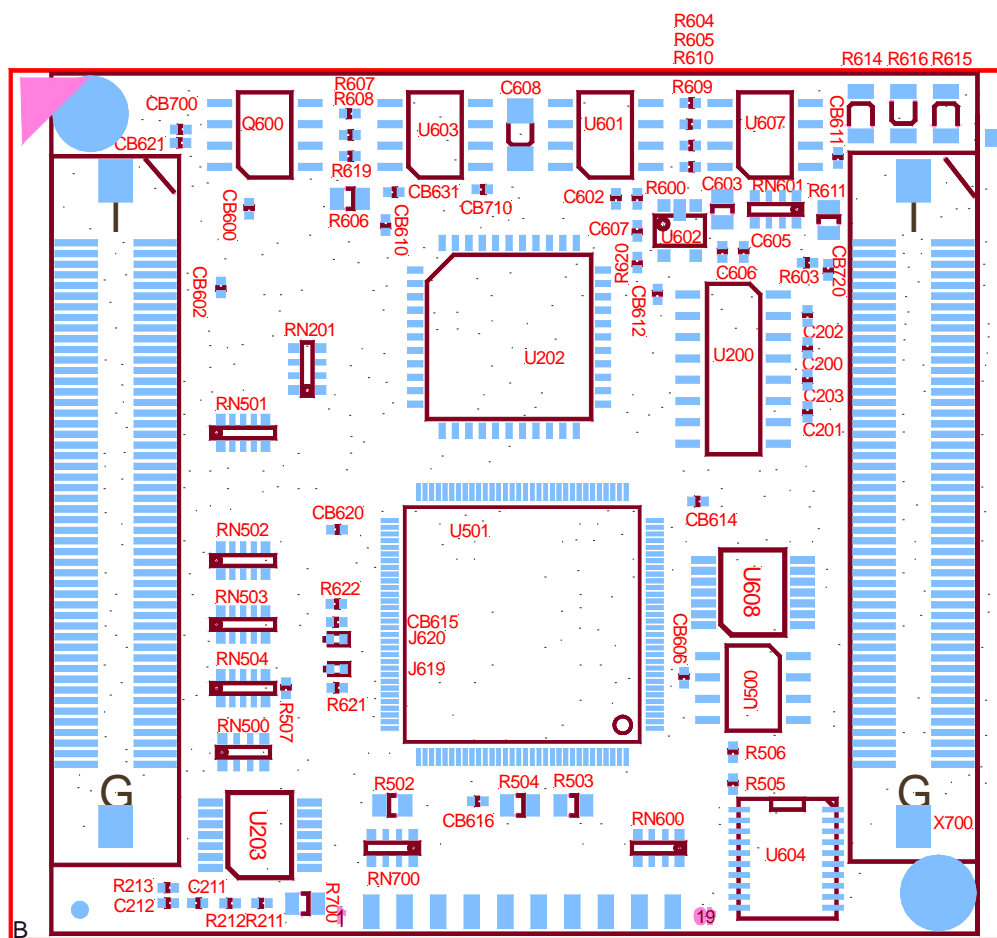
phyCORE-LPC2292/94 Component Placement, Bottom View
